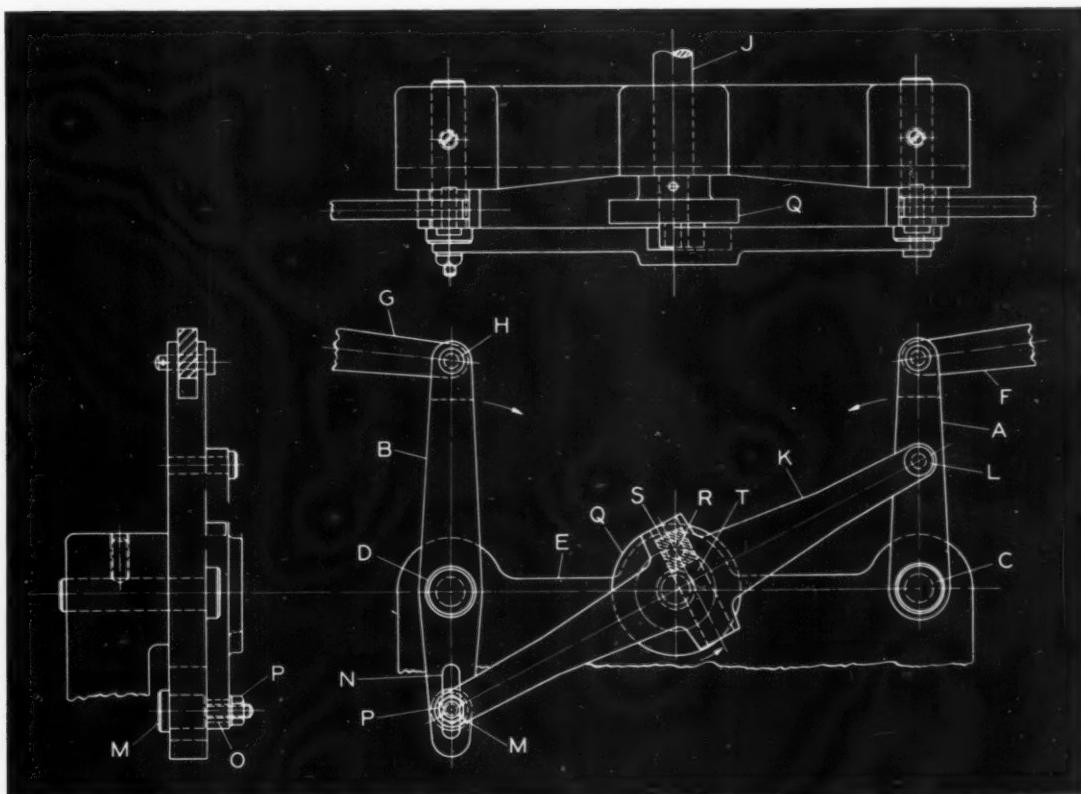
Drive mechanism for opposed reciprocating slides that permits stroke adjustment of one slide.
